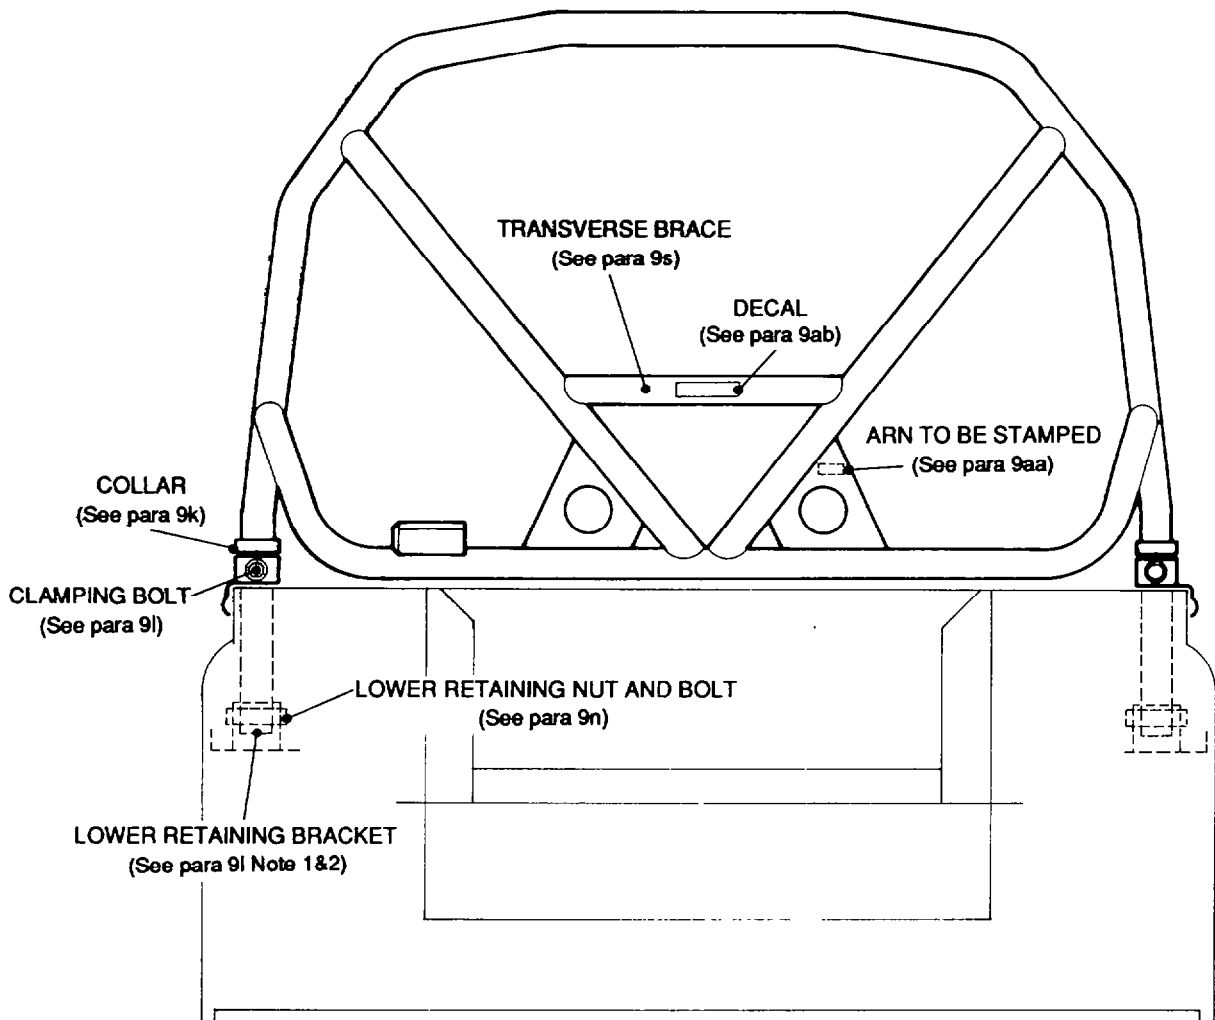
ROLL TUBE REAR VIEW (REAR BRACES NOT SHOWN)
